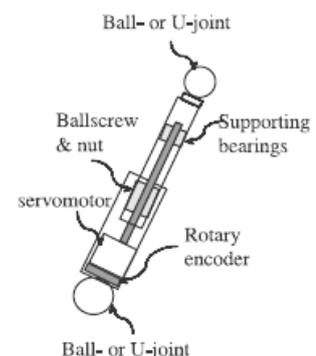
Example of one leg of a hexapod based parallel kinematic machine tool [3]
